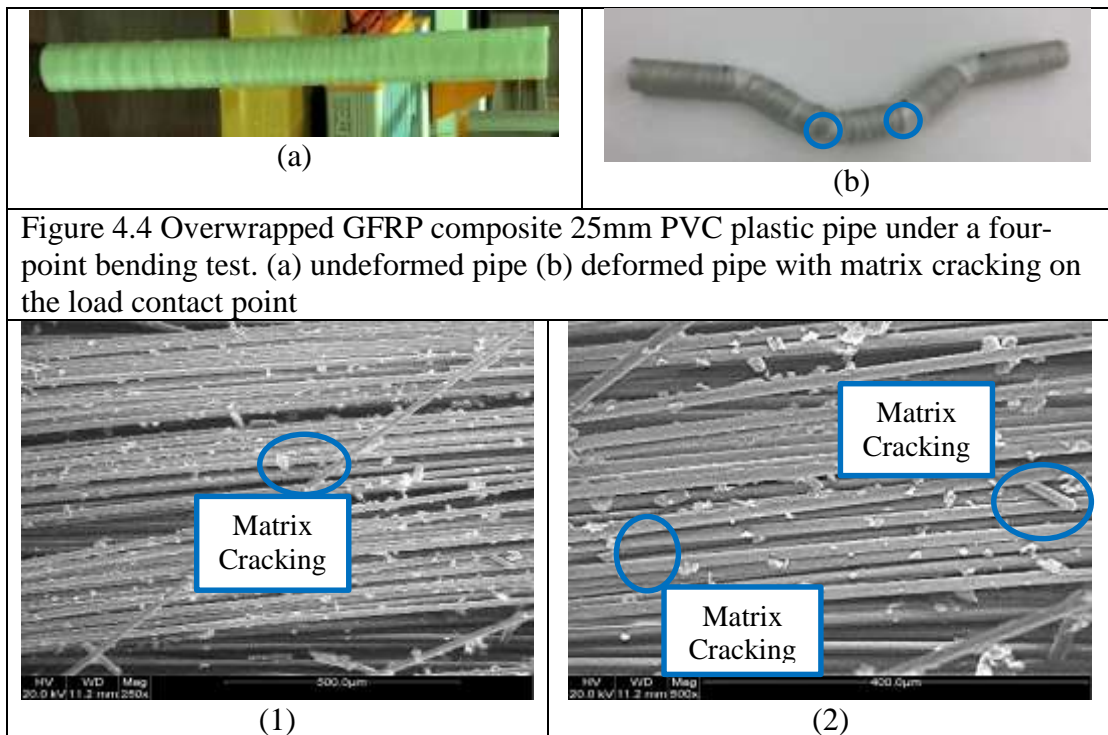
Overwrapped GFRP composite 25mm PVC plastic pipe under a four-point bending test. (a) undeformed pipe (b) deformed pipe with matrix cracking on the load contact point
